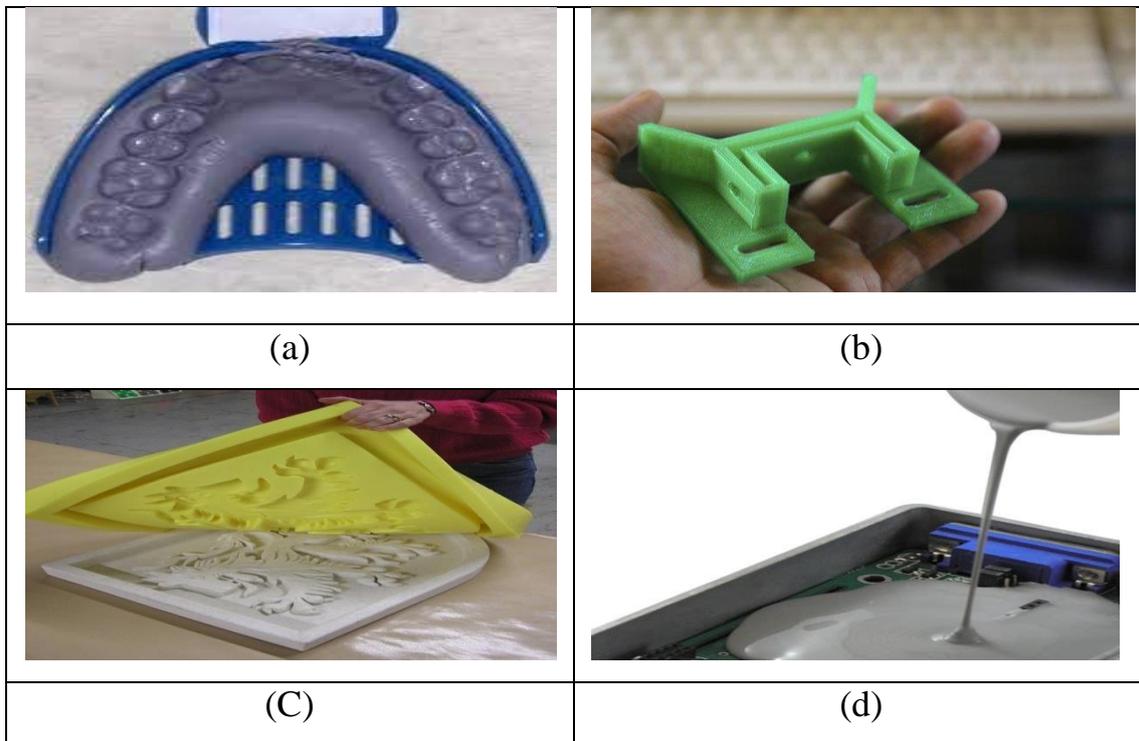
Photos of polysulfide resins used in (a) dental impression compounds ,(b) cast printing rolls ,(c) casting compounds for flexible molds, and (d) electrical potting[6].
